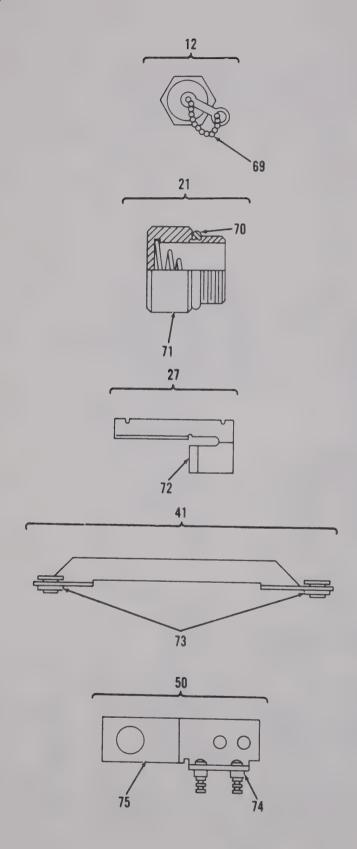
Control Assembly, Front Panel (Sheet 2 of 2).
